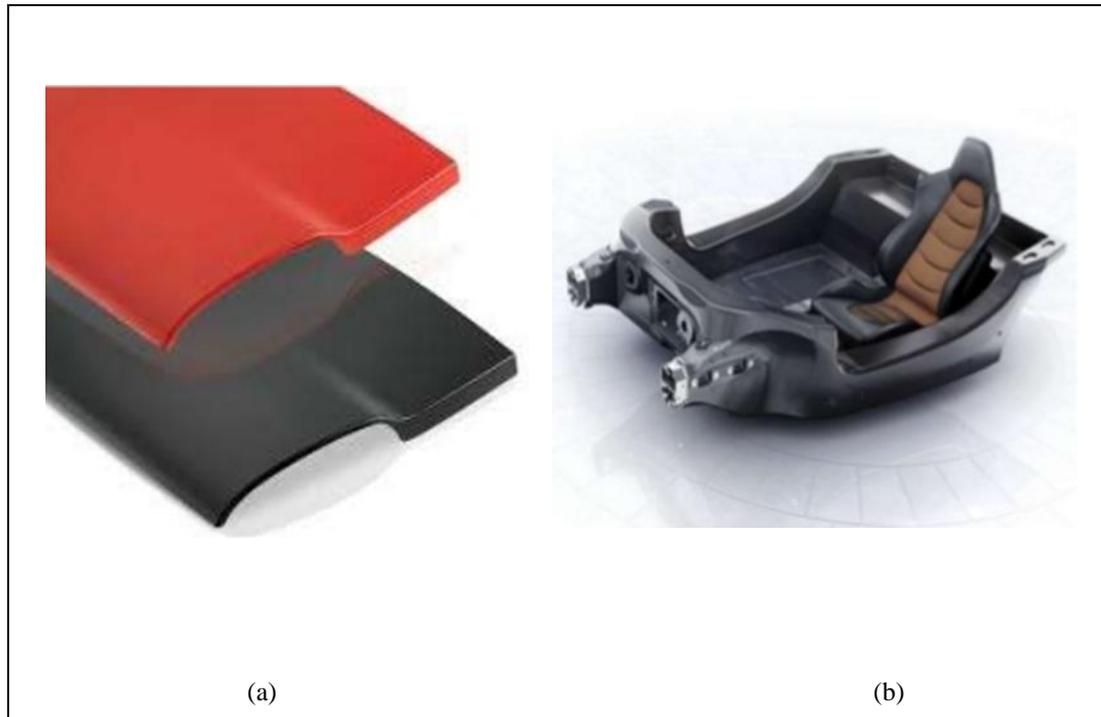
Complex aircraft parts (a) and automotive parts (b) fabricated using VARIM technique. [10, 13, 21]
